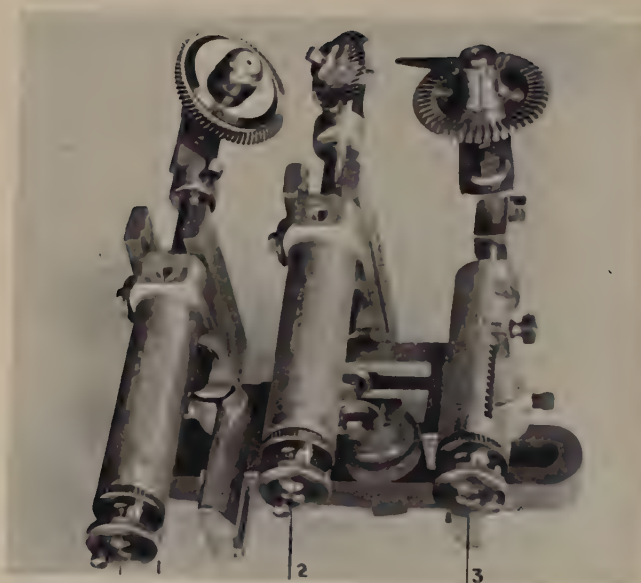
Arrangement for plain jersey: (1) clearing bur; (2) sinker bur; (3) jack presser.
